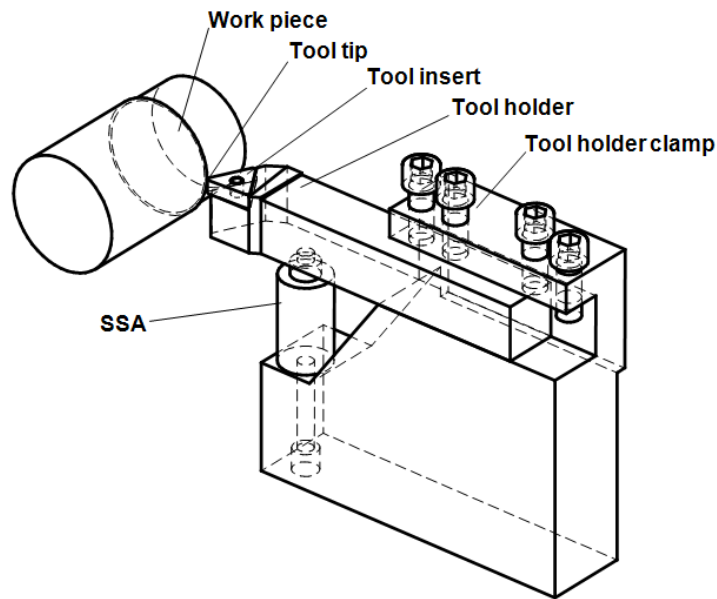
Tool-holder clamp with tool holder, SSA and work piece.
